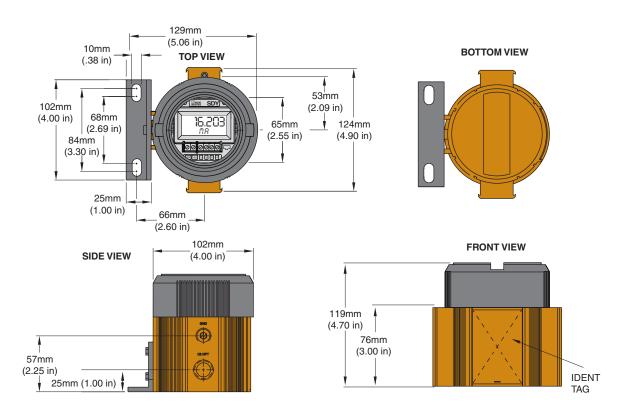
Dimensions of SDY Hockey-Puck with Flange Mount.
